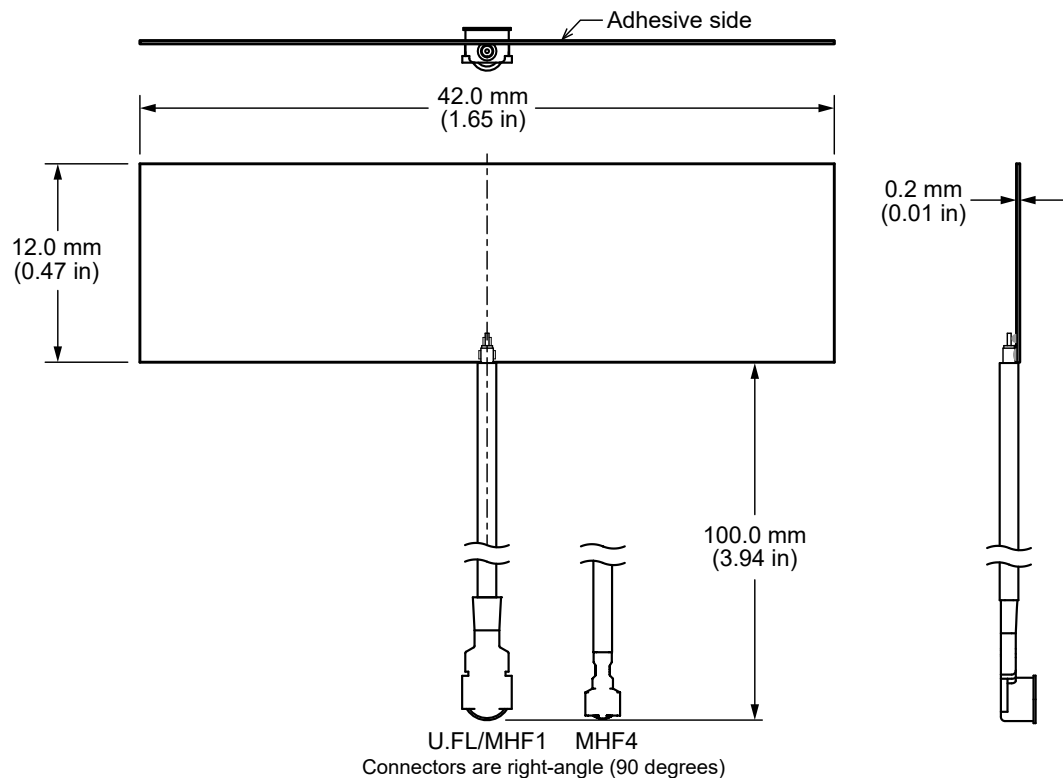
ANT-W63-FPC2-ccc-100 Dimensions
